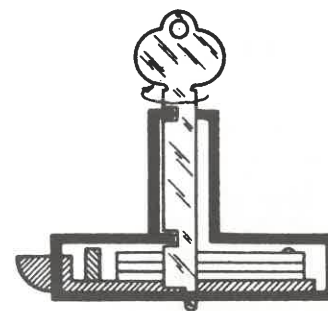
Position of Wards in Lever Tumbler Cabinet Lock
